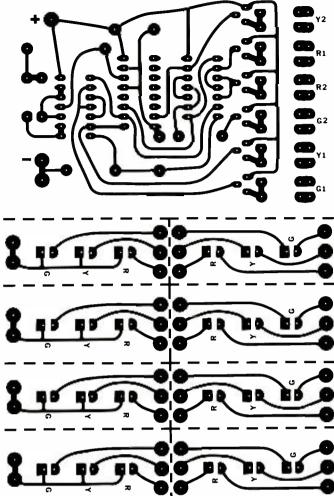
Actual-size foil pattern (above) and component layout (right). Board is divided into nine sections.
